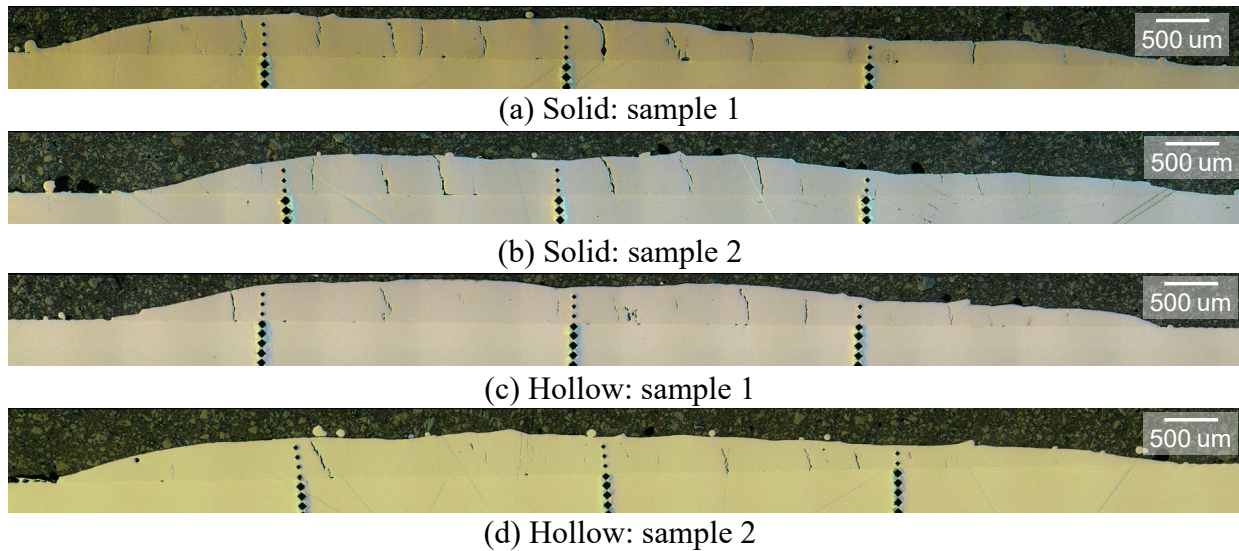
Cross-section of the cladding layer of (a, b) solid workpiece and (c, d) hollow workpiece.
